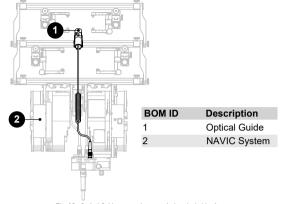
Optical Guide mounted to a vertical probe holder frame
